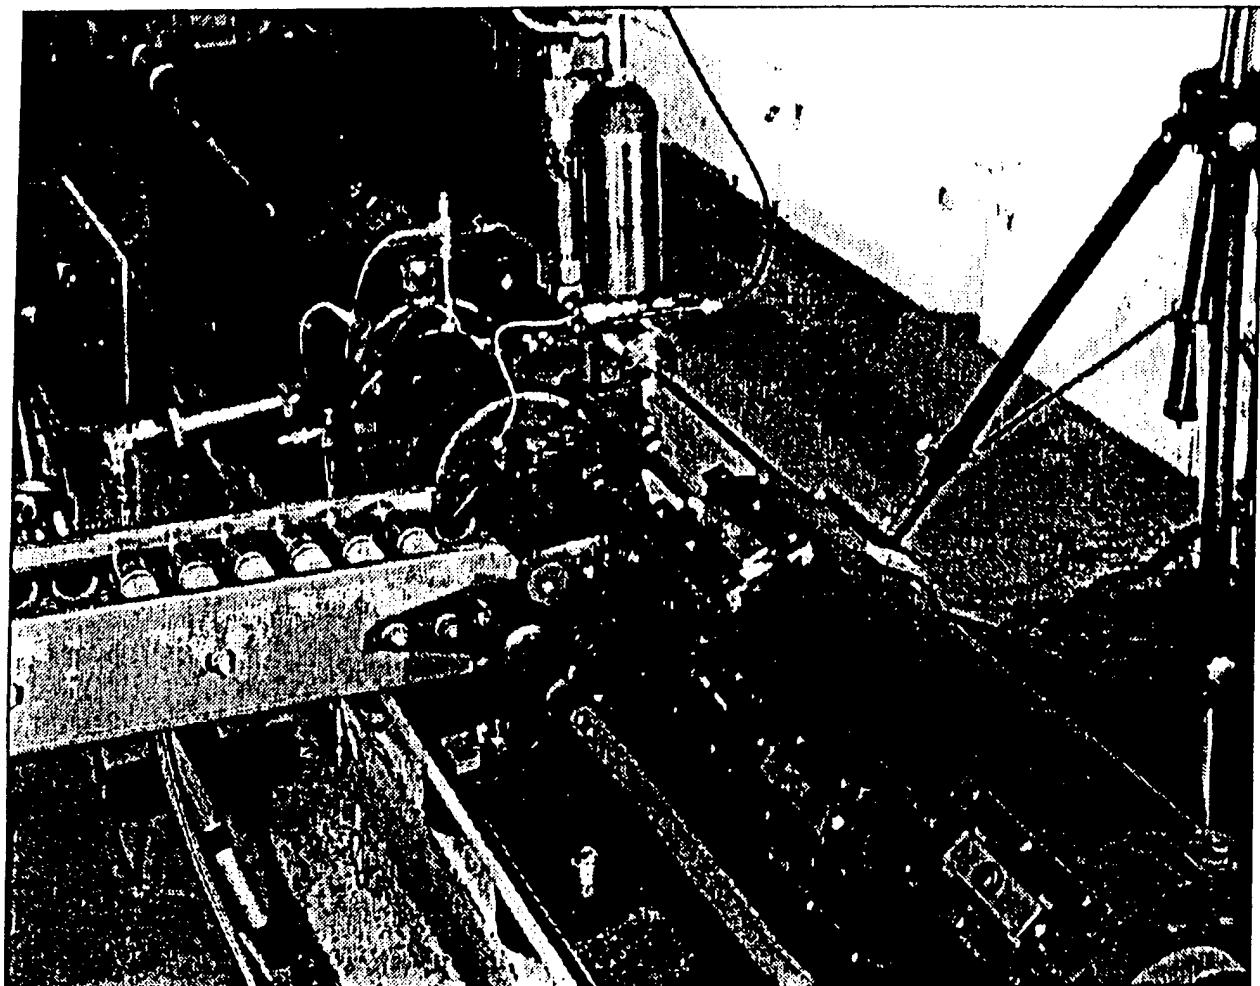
Picture of 30-mm RAP RLPG Burst Fire Test Fixture.
